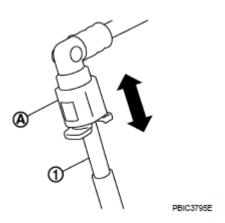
Pulling Quick Connector Courtesy of NISSAN MOTOR CO., U.S.A.
